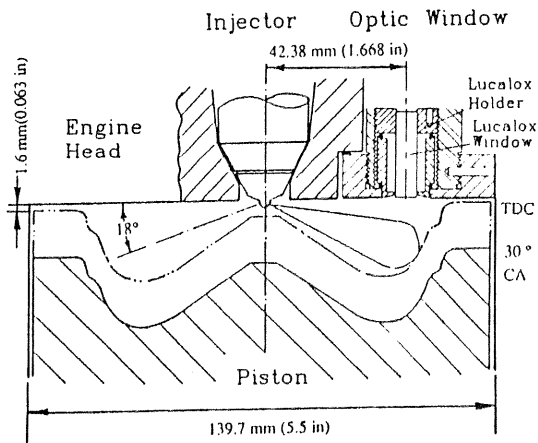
Schematic shows sensor of Fig. 10 mounted in engine.
